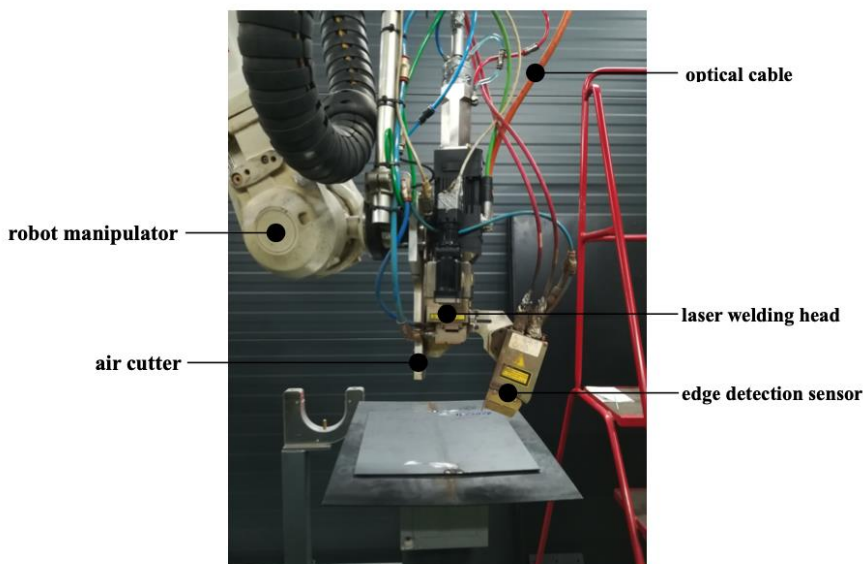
Overview of the interior of the welding machine cell: the IPG welding head is ready for the welding of the semi-finished specimens from a Docol 1200M sheet
